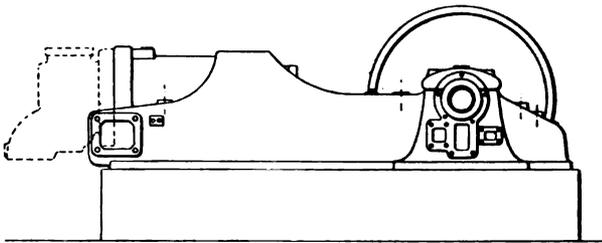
Frame Casting with provision for Cam Shaft Brackets.
